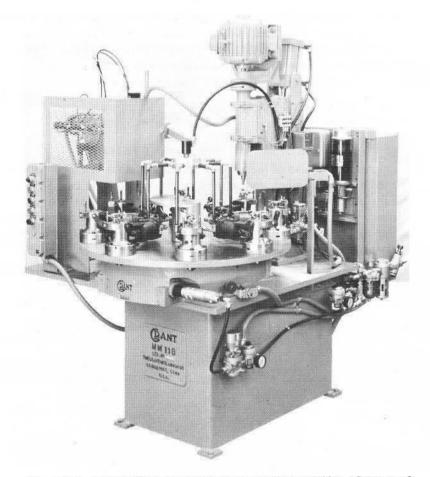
Pneumatically controlled riveting assembly machine. (*Courtesy of* C. A. Norgren Co., Littleton, Colorado).
